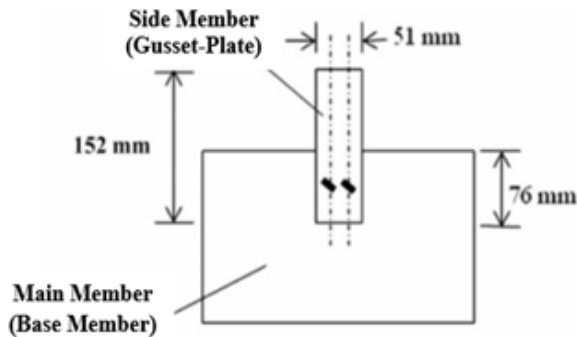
General view of a glued gusset-plate wood joint connected with multi-stapled and glue
